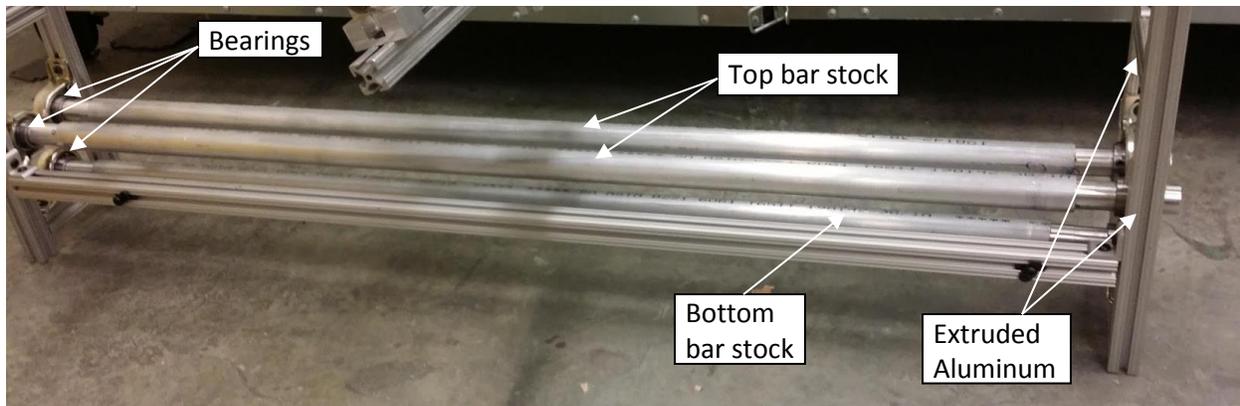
Tube roller system constructed with 80x20 extruded aluminum, aluminum bar stock and bearings.
